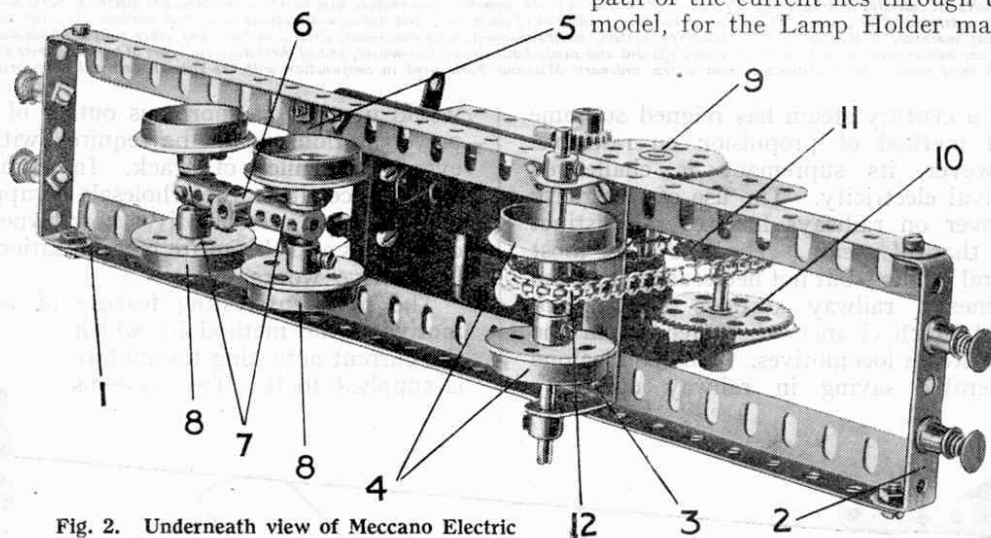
Underneath view of Meccano Electric Locomotive, showing driving mechanism, etc.
